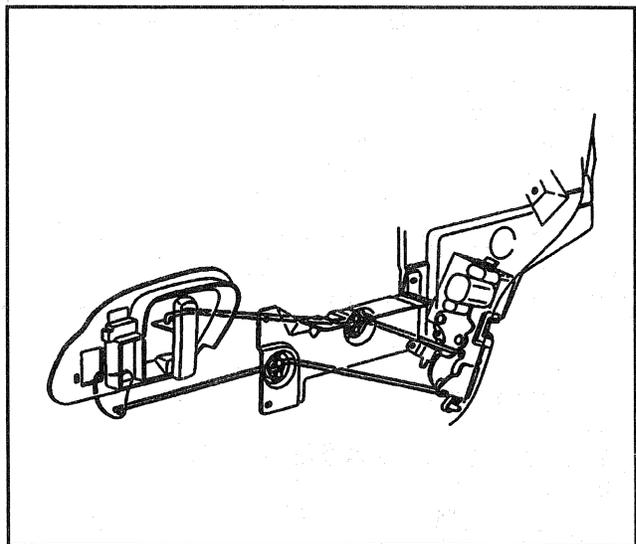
Inside Rear Side Door Handle and Lock Control Rods
